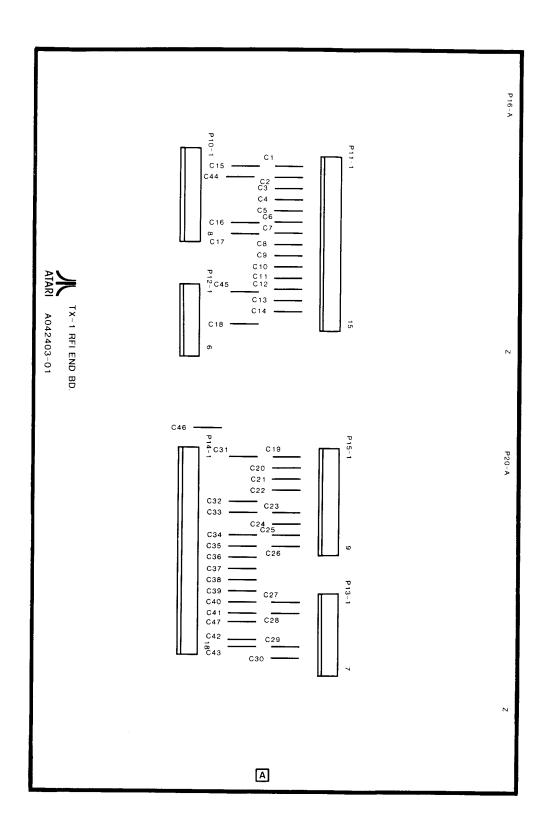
TX-1 EMI Shield PCB Assembly A042403-01 A
